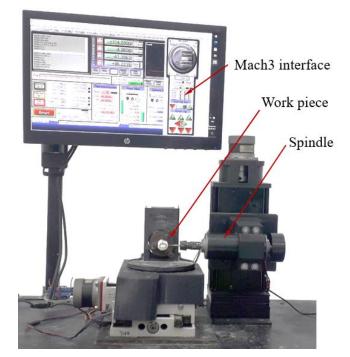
Mach3 interface and structure of CNC machine after fabrication
